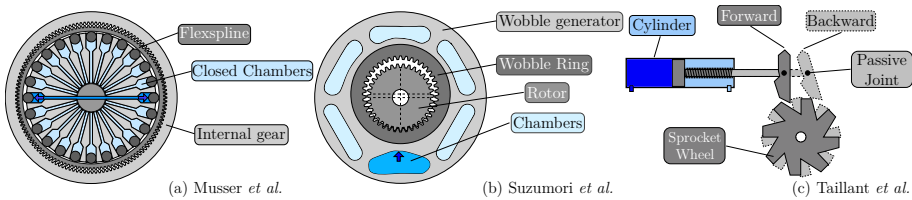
Conceptual schematics of early Pneumatic Stepper Motor (PSM) designs: (a) The design of Musser (1963) [30] utilizes a series of closed radial chambers that deform a flexspline upon radial expansion, engaging with an internal gear to generate rotational motion. (b) The concept of Suzumori *et al.* (1998) [31] employs six concentrically arranged chambers and an internal gear set to convert reciprocating motion into rotation. (c) The mechanism of Taillant *et al.* (2004) [32] features a solid articulated head connected to a piston, which pushes a sprocket wheel to create rotational stepping motion.
